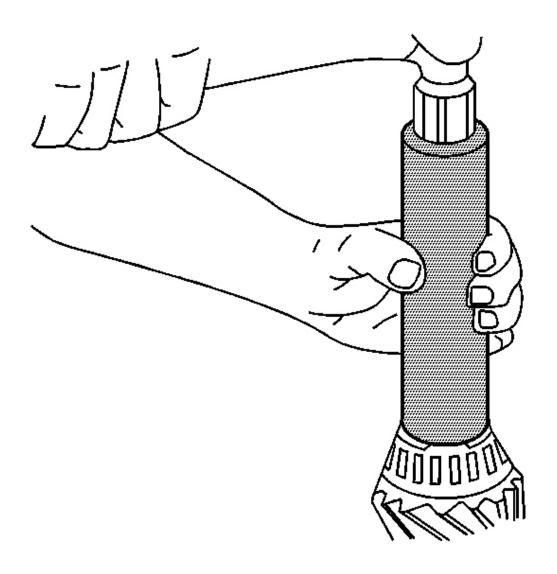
Installing Inner Pinion Bearing Onto Pinion Gear Courtesy of GENERAL MOTORS CORP.
